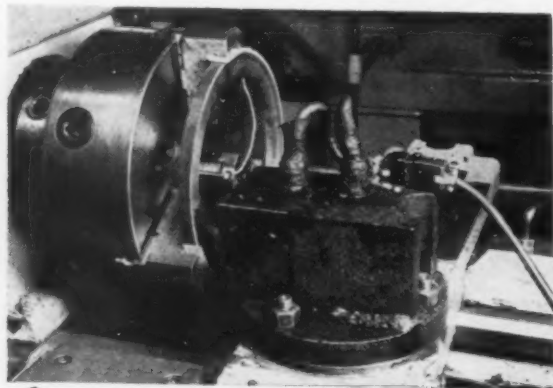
In tool temperature a gray iron ring was set up in lathe, insulated from the chuck, wired into a thermocouple system. Hot junction is the tool-chip interface.
